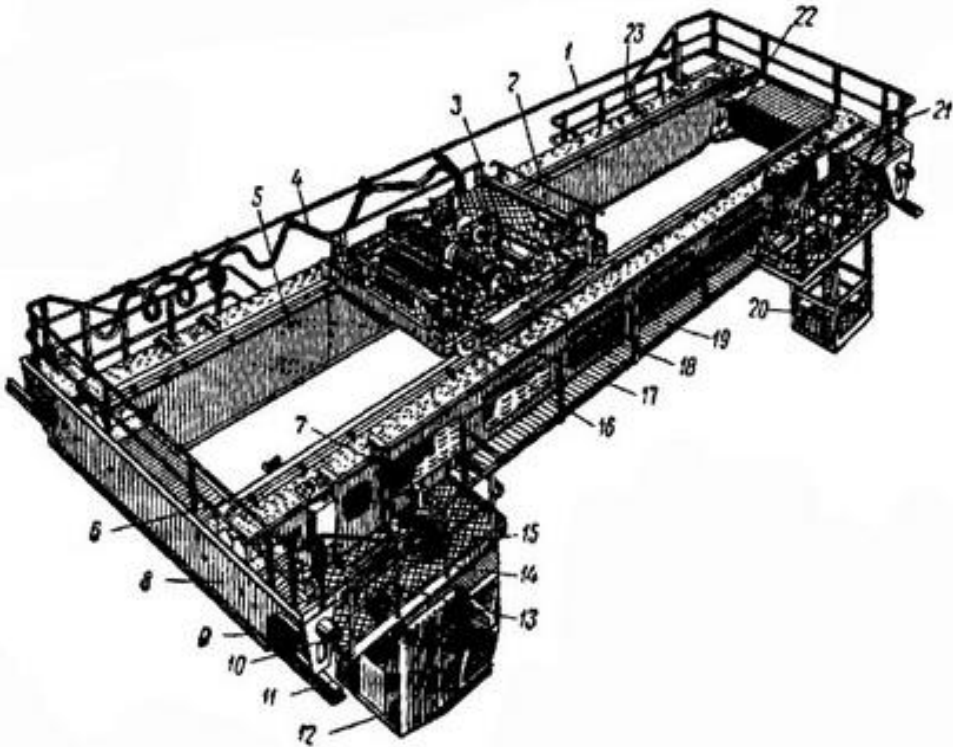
Bridge double-girder electric crane of general purpose with a capacity of 50 tf
